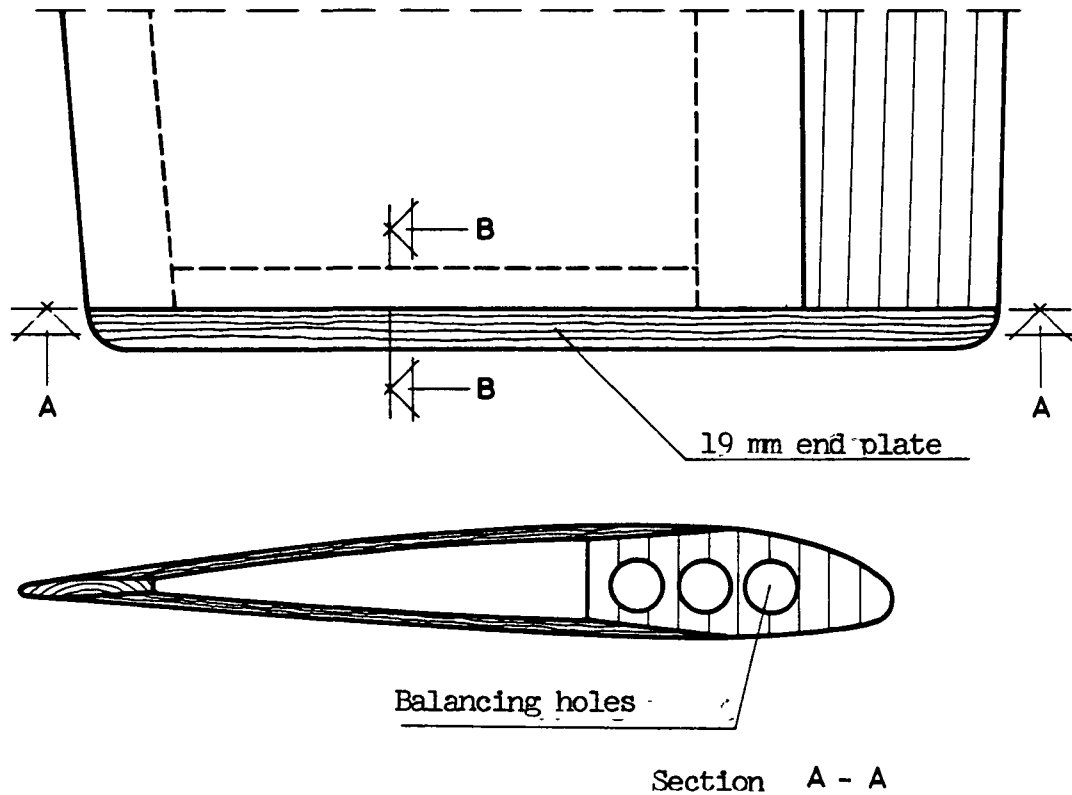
Shape of the blade tip. The principle with a grooved end plate as illustrated is also used at the root end of the blade.
